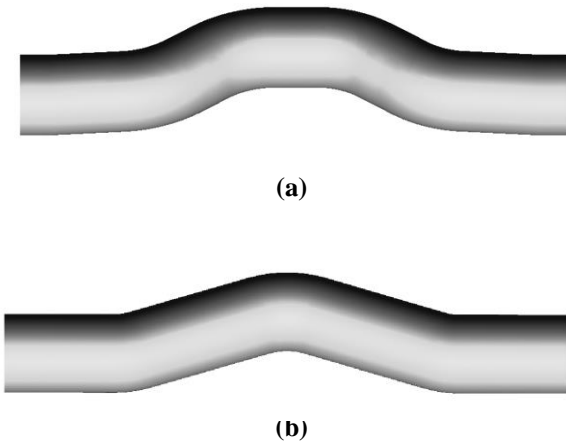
Geometry of bent tube for tube hydroforming (a) part design from center line of tube hydroforming part (b) modified part design considering CNC bending process
